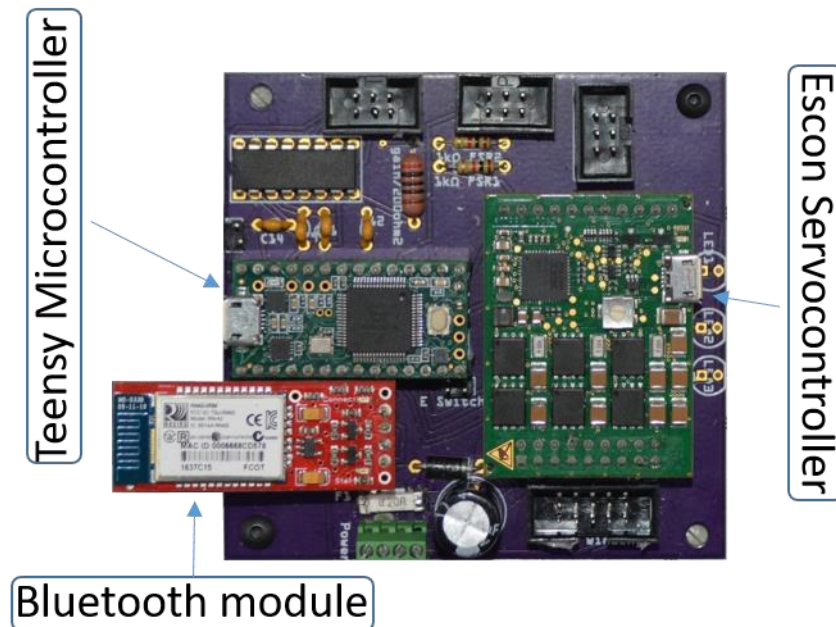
Custom PCB for the ankle Exoskeleton. This PCB has connections for the Teensy microcontroller, Bluetooth module, Escon servocontroller, one motor, and two FSRs.
